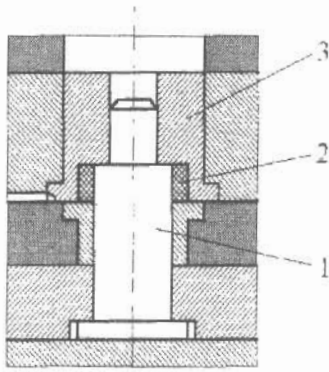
The active region of the single-cavity mould used to obtain the "bearing" element:
